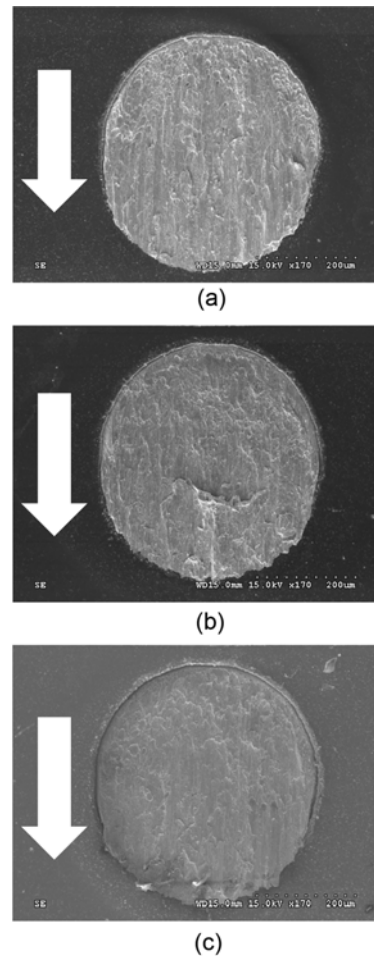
Fracture surfaces of the Sn-37Pb BGA solder joints after high-speed shear testing under various shear speeds: (a) 0.01 m/s, (b) 0.1 m/s, and (c) 1 m/s.
